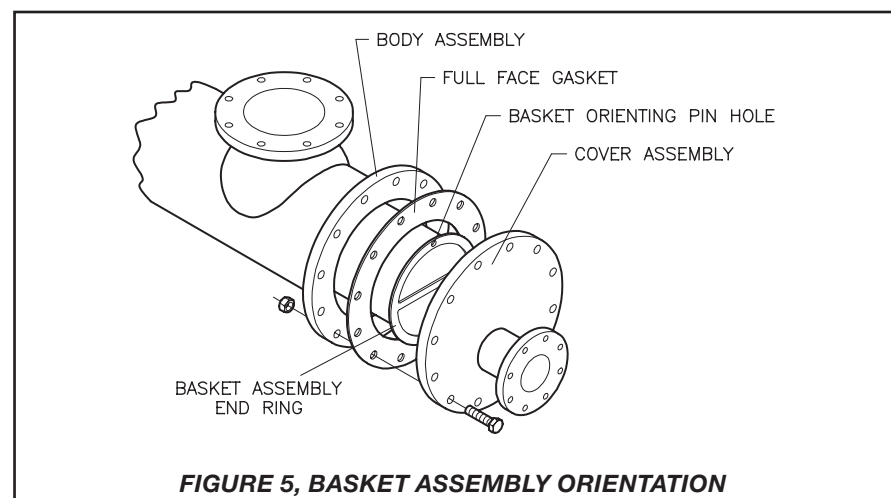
, BASKET ASSEMBLY ORIENTATION
